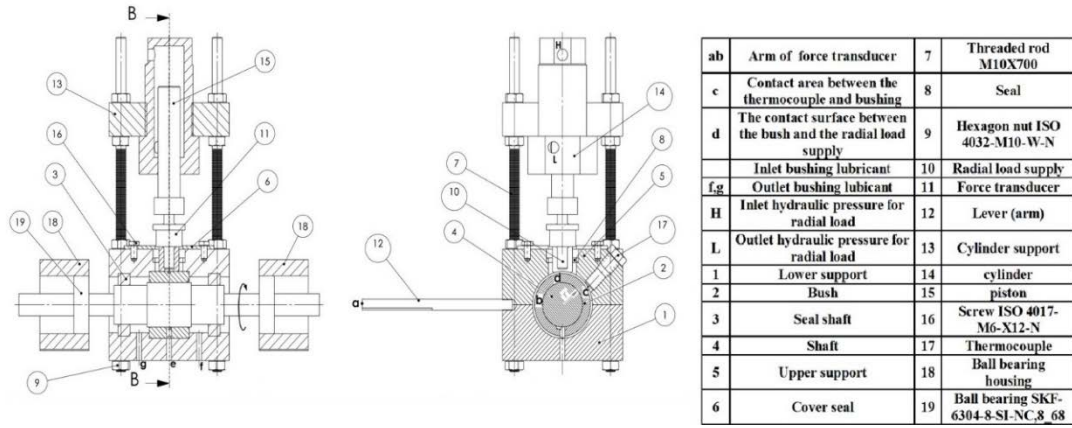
Schematic of the tool developed for testing of plain journal bearings of configurations
